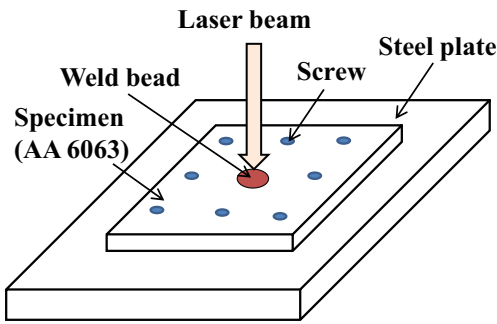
Schematic of laser spot welding system in the experiment
